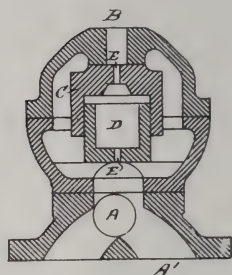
SECTIONAL ELEVATION OF "GREL" VALVE BOX AND VALVES.
